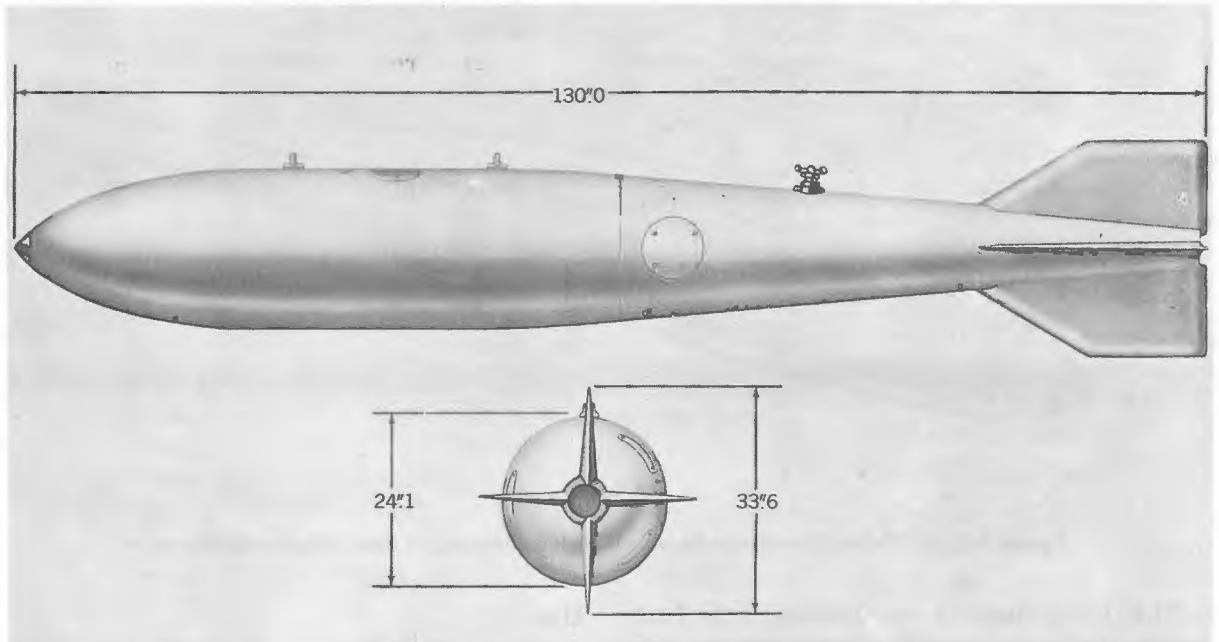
3000-lb Demolition Bomb M118 (Mechanically Fuzed), Exterior View.
